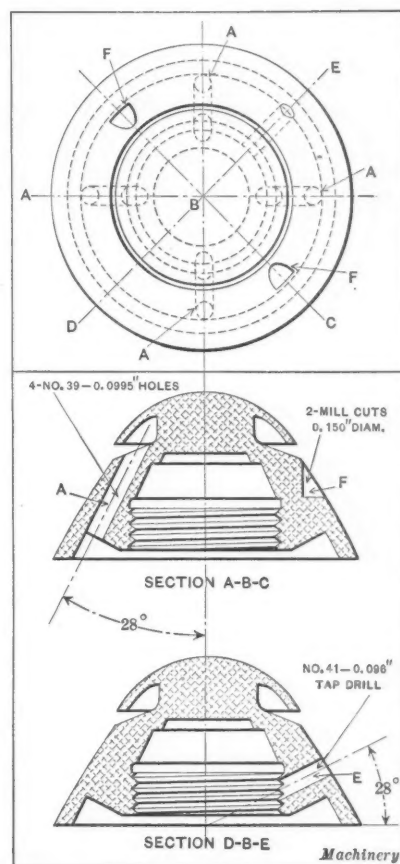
Aluminum Closing Cap used on Shrapnel Fuse
